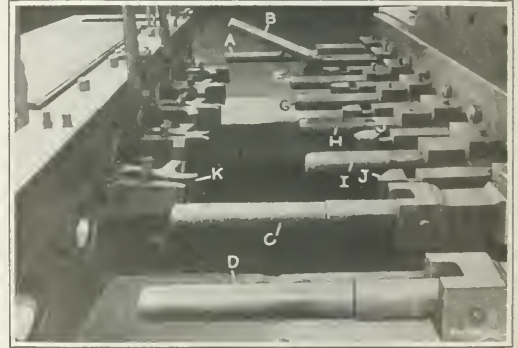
Arrangement of Dies and Punches on Williams & White Bulldozer for forging Russian High-explosive Shells
